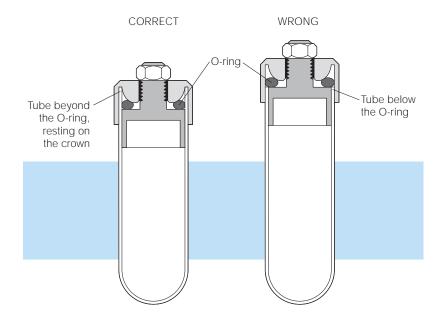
Tube Cap Installation. The tube must be pushed up past the *O-ring so that the crown will clamp the tube and NOT the O-ring.
